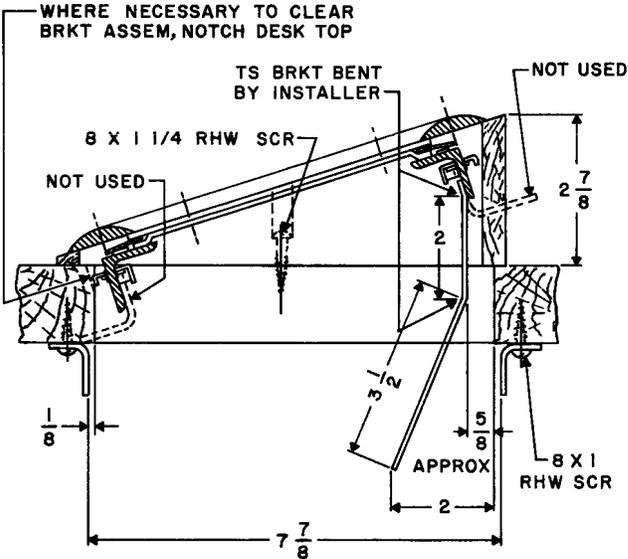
Installation of Framework for Tilting 101B Key Equipment
